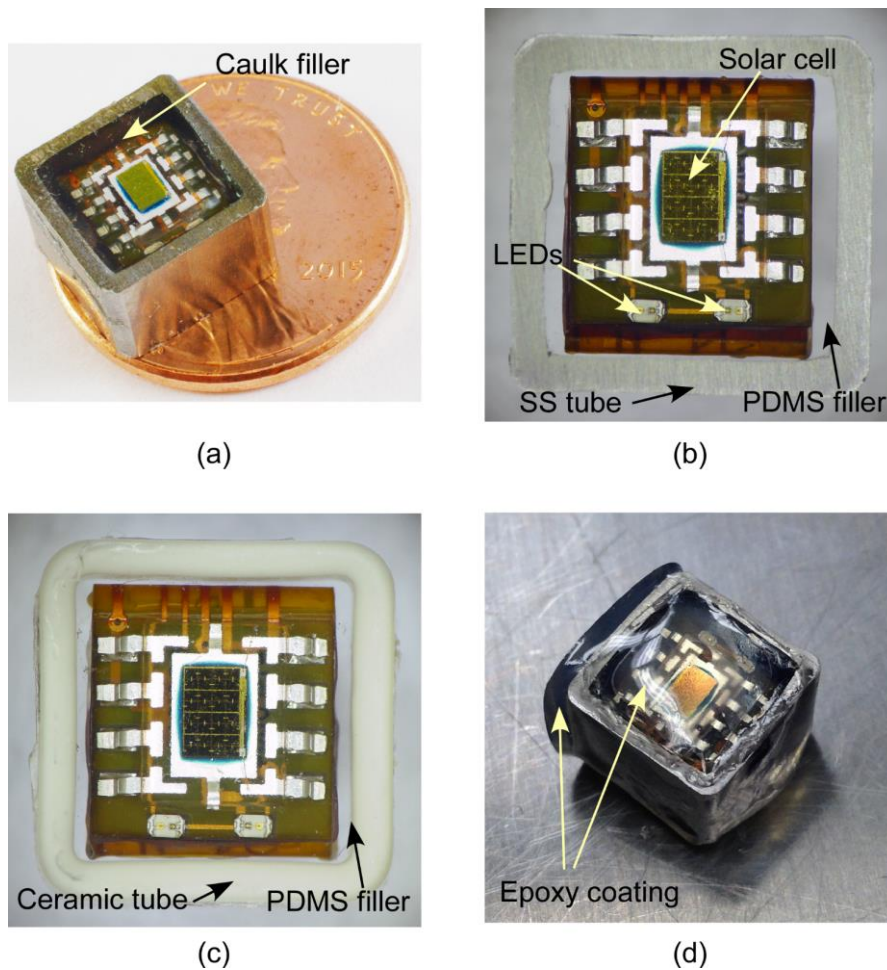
ELM systems after packaged in polymer-in-tube packages: (a) SS tube and caulk filler; (b) SS tube and PDMS filler; (c) ceramic tube and PDMS filler; (d) SS tube and PDMS filler with epoxy coating.
